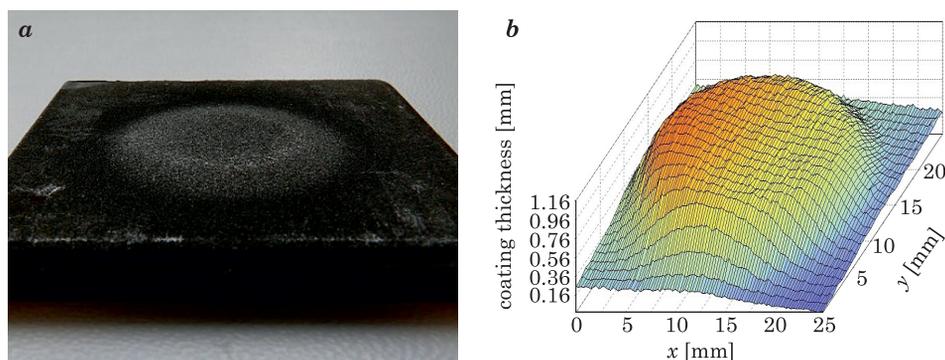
FeAl coating sprayed onto 15HM (13CrMo4-5) boiler steel under GDS conditions specified in Table 1: *a* – macro image, *b* – 3D geometric dimensions of the FeAl coating after 100 gun shots
